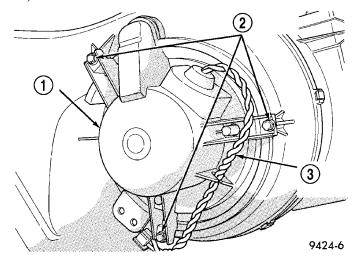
BLOWER MOTOR RETAINING SCREWS
